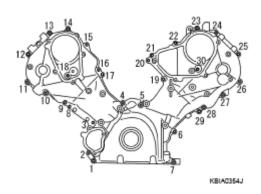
Identifying Mounting Bolts Tightening Sequence
